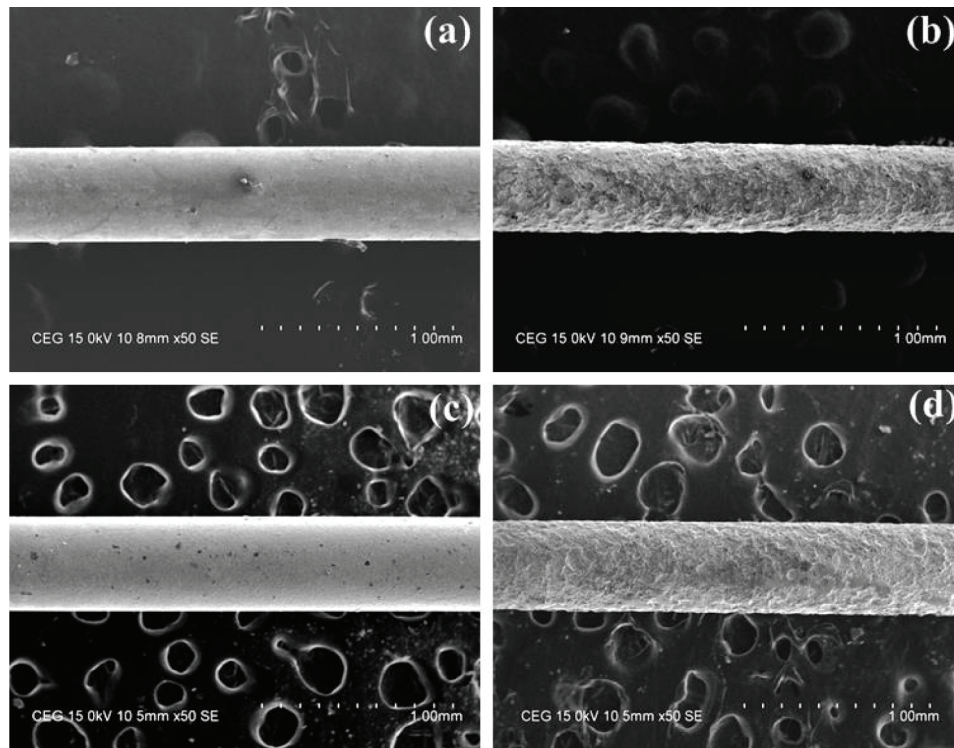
(a) Uncoated electrode before machining; (b) uncoated electrode after machining; (c) coated electrode before machining; (d) coated electrode after machining.
